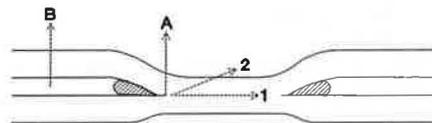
Schematic illustration of the weld. The arrows represent the different fracture surfaces found and the striped areas the expelled material.
